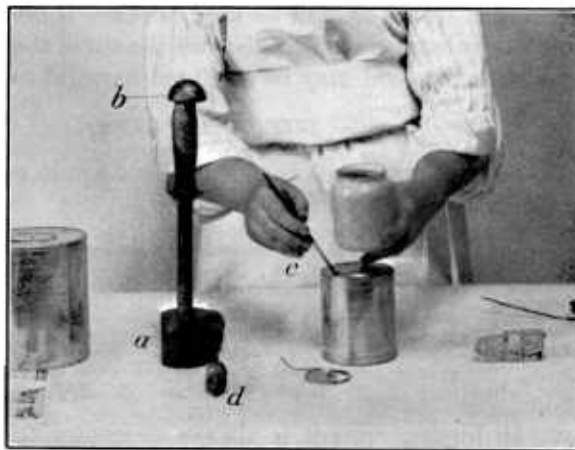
Applying the flux, the first step in soldering tin cans: a, Capping iron; b, head of inner upright steel; c, proper position of brush while stroking rim of cap with flux; d, tipping copper or soldering iron.
